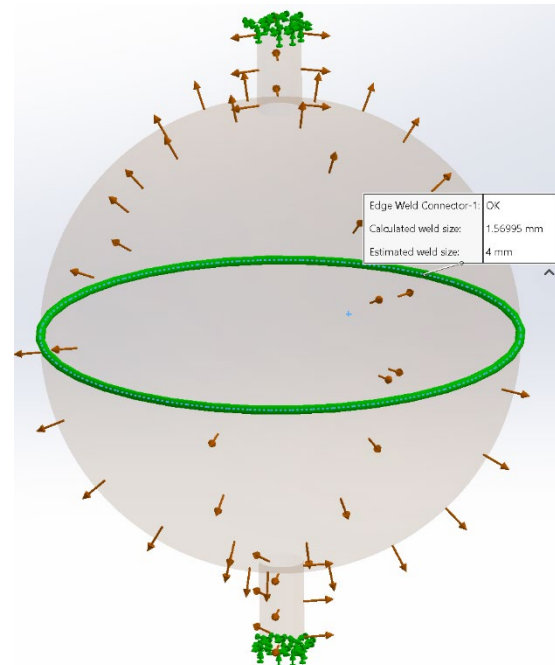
Traditional PV Weldment @ 737.5 PSI
